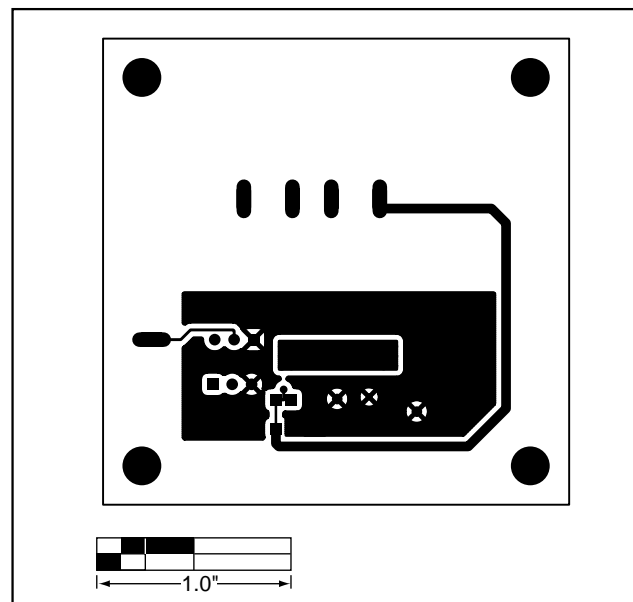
MAX1623 EV Kit PC Board Layout—Solder Side
